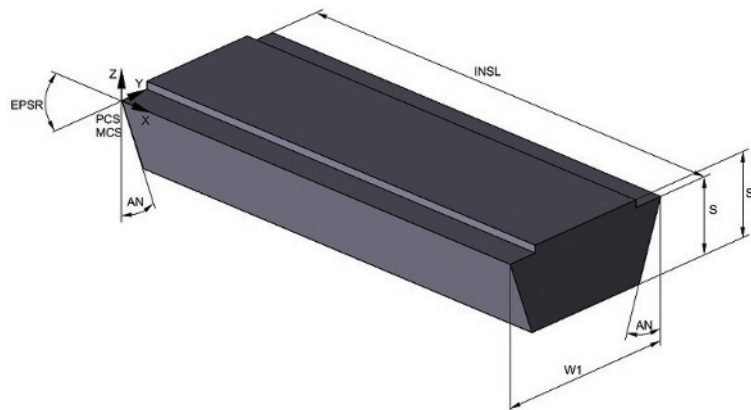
Basic geometry of a reaming insert with two cutting edges
